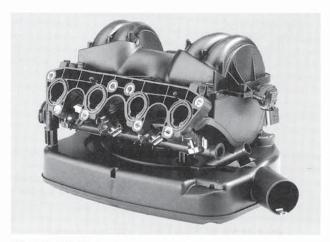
Air intake manifold (GF-PA6, assembled with vibration-welding method)
